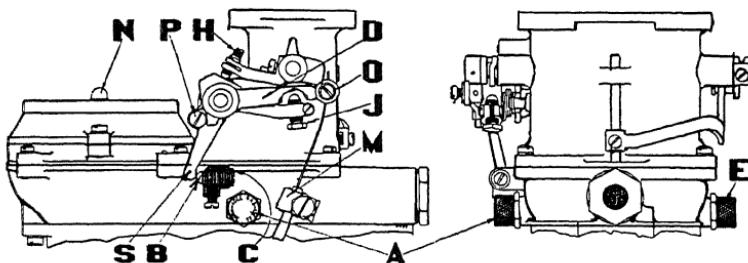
Service Drawing of Schebler Model "S" Duplex Carburetor
